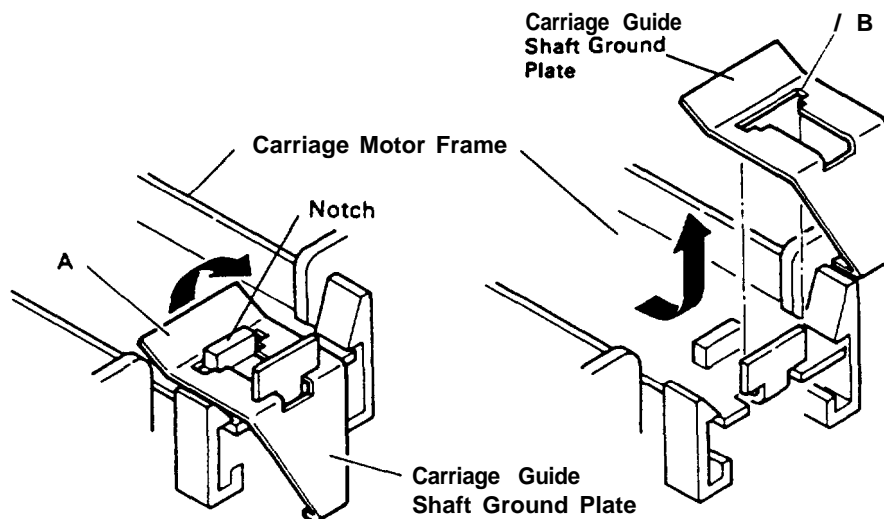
Removal of Carriage Guide Shaft Ground Plate
